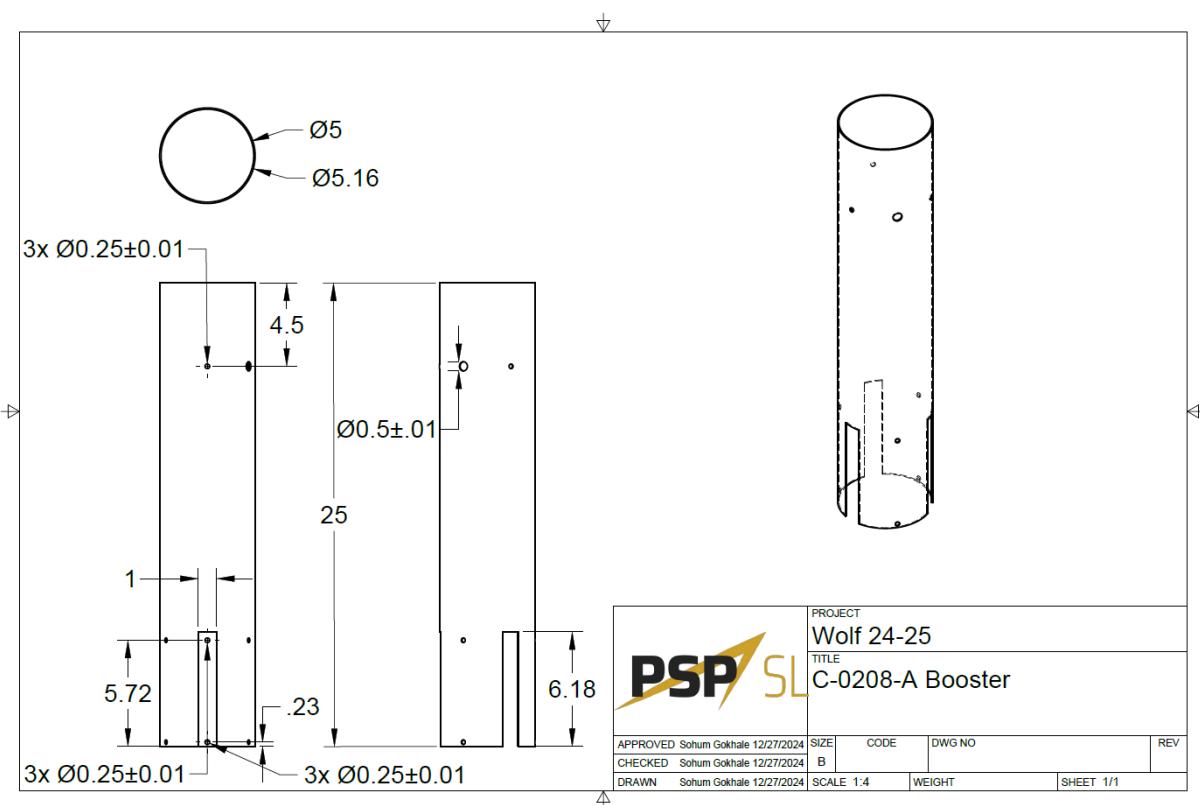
Booster Airframe Technical Drawing
